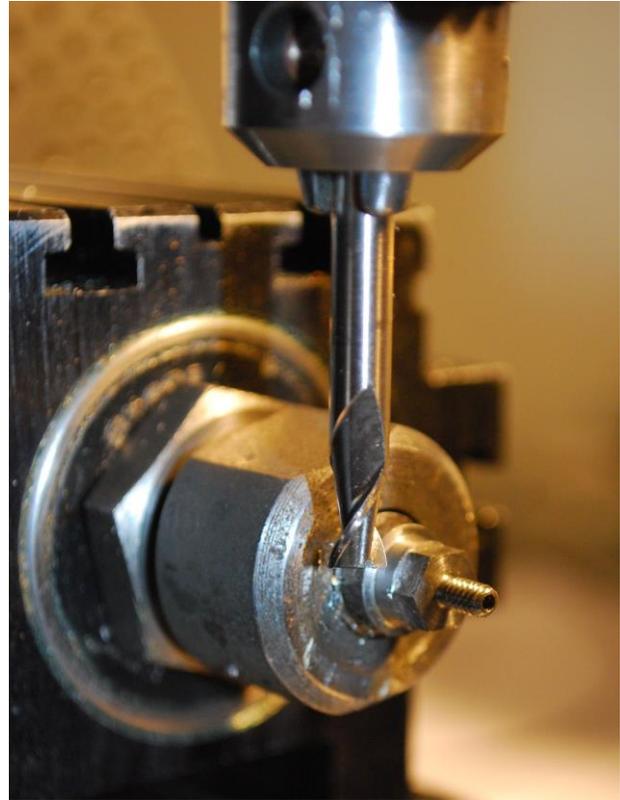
Milling the flats on the intermediate arbor. An index plate mounted on the other end of the headstock provides the 6 divisions required. Note a drill chuck is used to hold the end mill since the collet assembly was in use holding the work piece.
